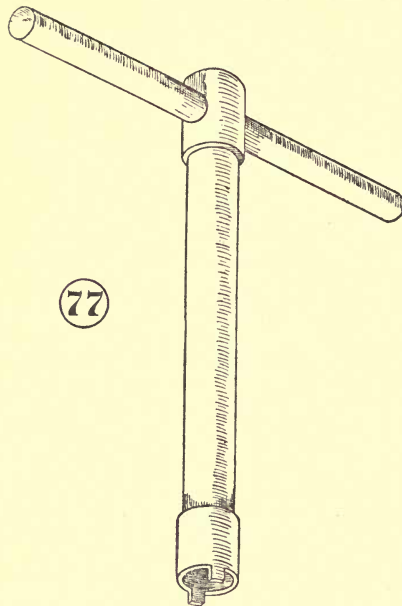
Special tool for removing and replacing the inlet needle seat on the Holley carbureter
